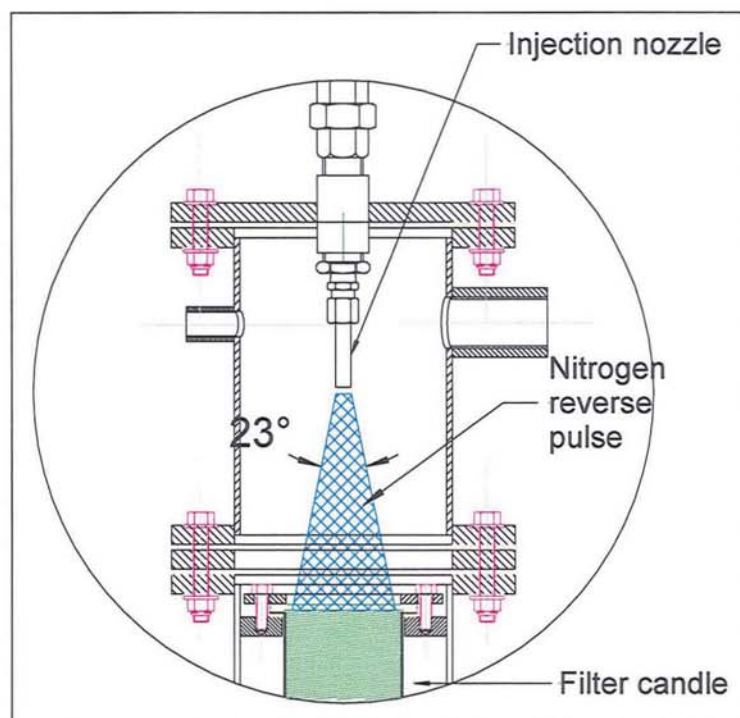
Drawing of reverse pulse injection showing the correlation between angle of discharged flow and distance to nozzle (Drawing CALDO Eng, modified J.Sitzmann)
